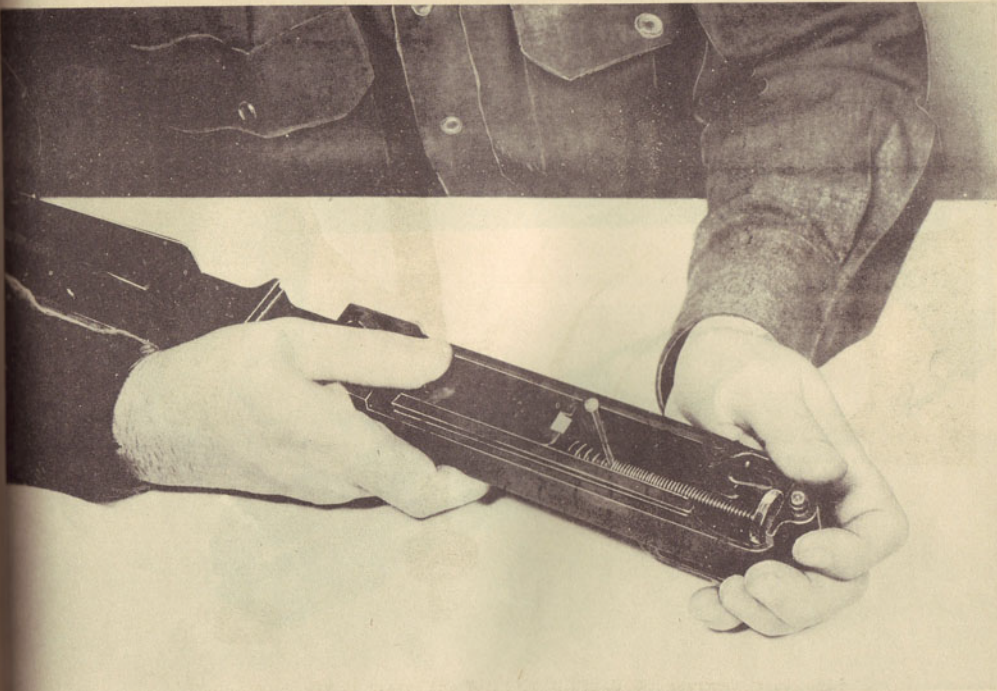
Assemble BUFFER PAD to PILOT slide free end of RECOIL SPRING into recess in ACTUATOR and engage the PILOT in the PILOT HOLE of the RECEIVER.
